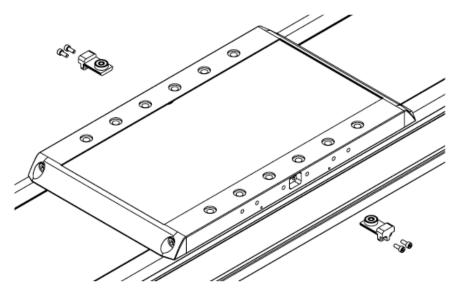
Disassembly/Assembly of the cover strip clamp
